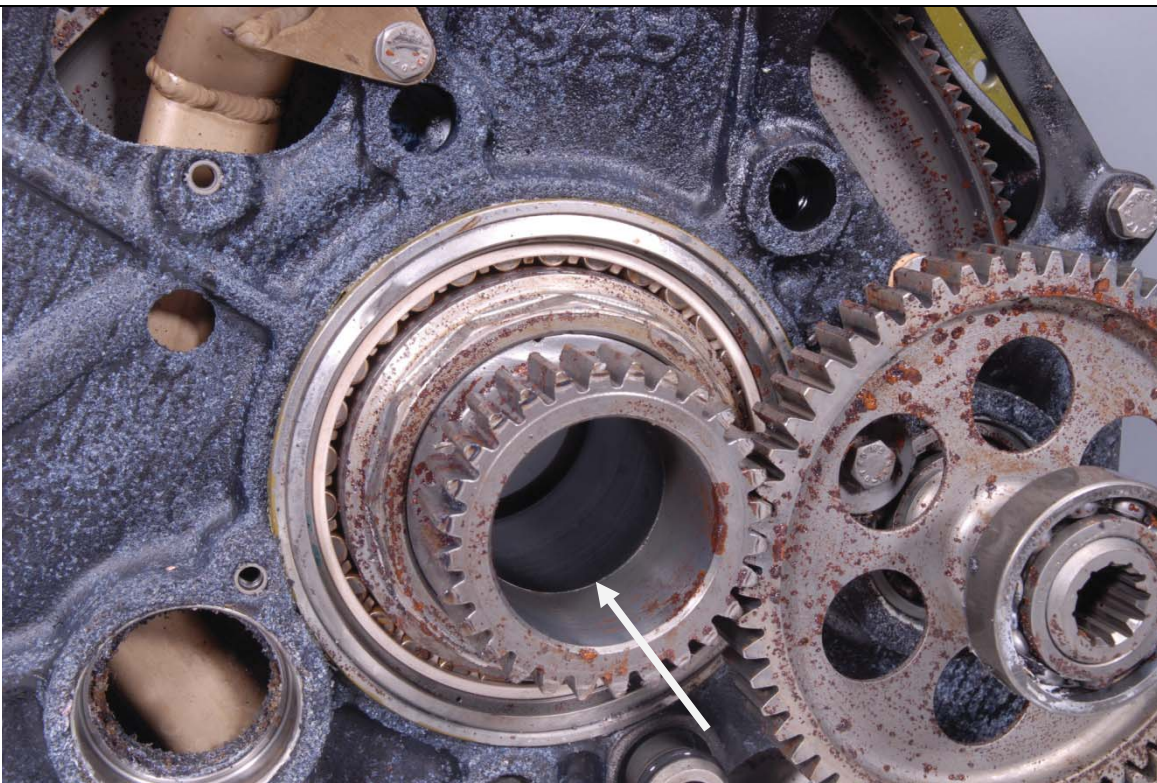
P-79297C, Sun Gear, Forward Inner Bore Rotational Scoring, FLA
